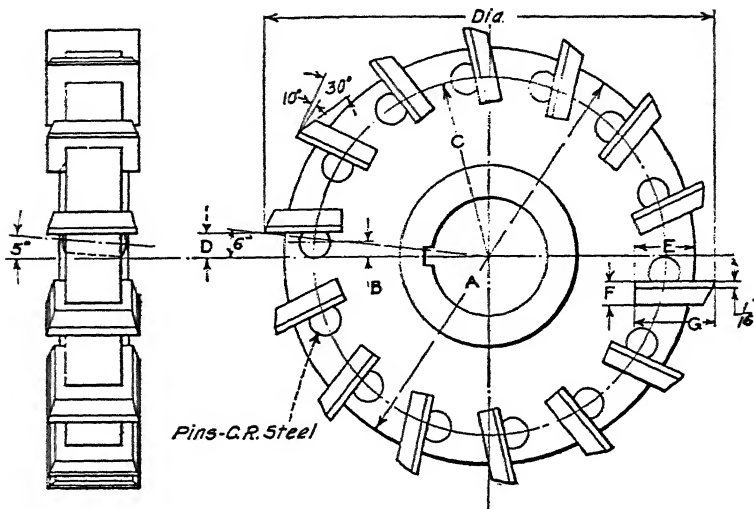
shows another type of inserted tooth milling cutter made with a solid body as shown. This type of cutter is designed primarily for face milling, and the body screws directly on to the spindle. The proportions and various dimensions given will be found useful in proportioning cutters of this kind.
